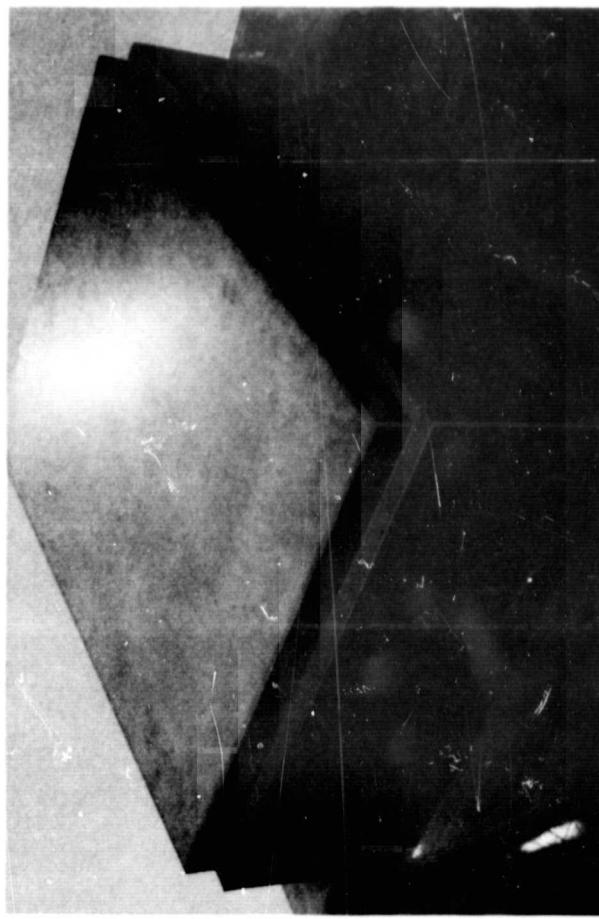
ASSEMBLY OF PACK, STEP 9
